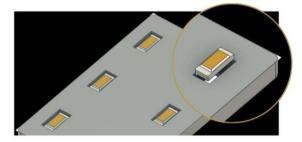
3D printed PCB with detachable LED as a SMD component
